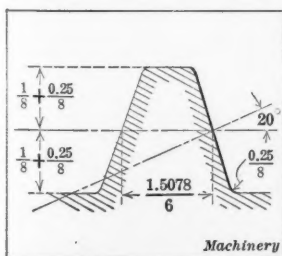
Hob Tooth for a 6/8 Pitch Fellows System Stub Gear Tooth
